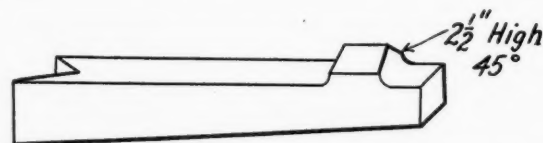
Limb or Pedestal Ready to Be Welded to Frame Back.
